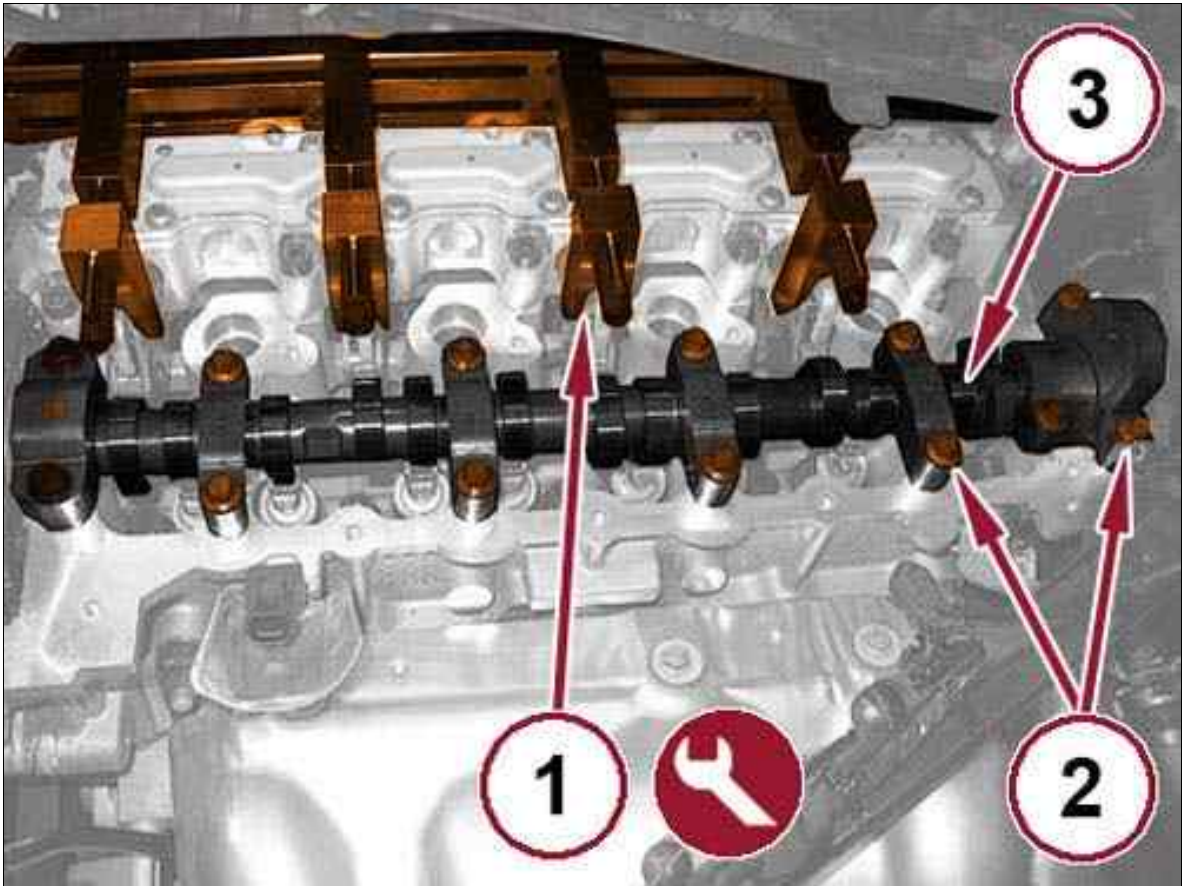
Compressing MULTIAIR Actuator Spring Using Special Tool & Locating Front MULTIAIR Actuator To Cylinder Head Bolt
